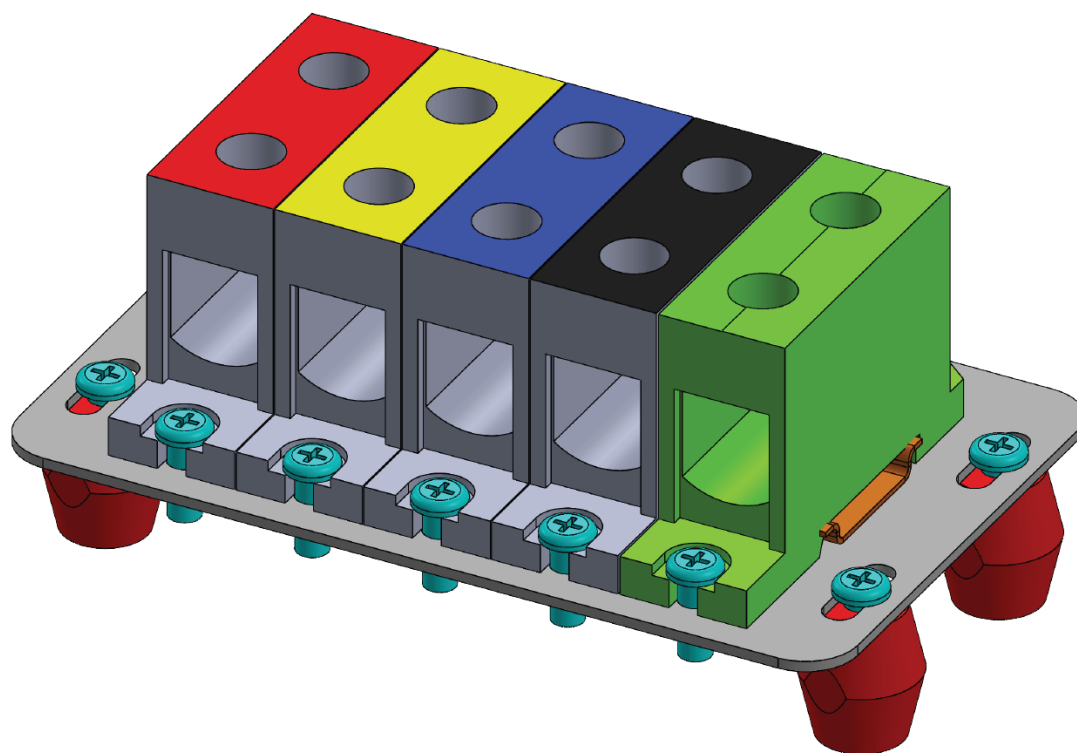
Detail Drawing of Incoming (SEC) Terminal Block 2.0 mm Stainless Steel Mounting Plate for Double-Meterbox with Steel Enclosure
